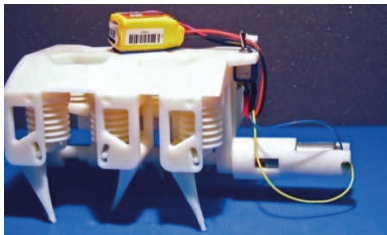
Hexapod robot with all mechanical parts fabricated in a single step.
